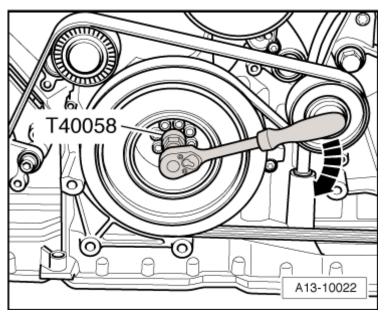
Identifying Torque Converter Bolts Using Adapter T40058
